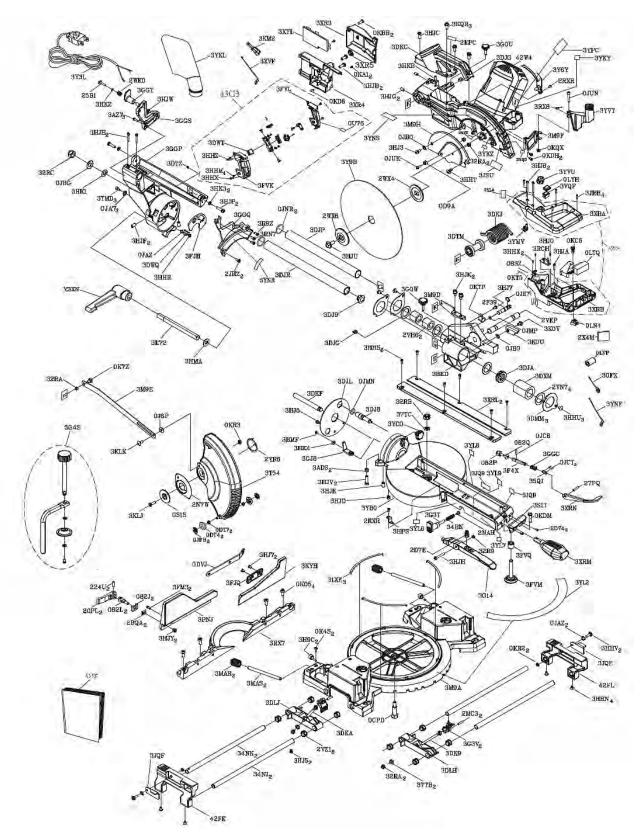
Spare parts drawing 1 KGZ 2540 VARIO
